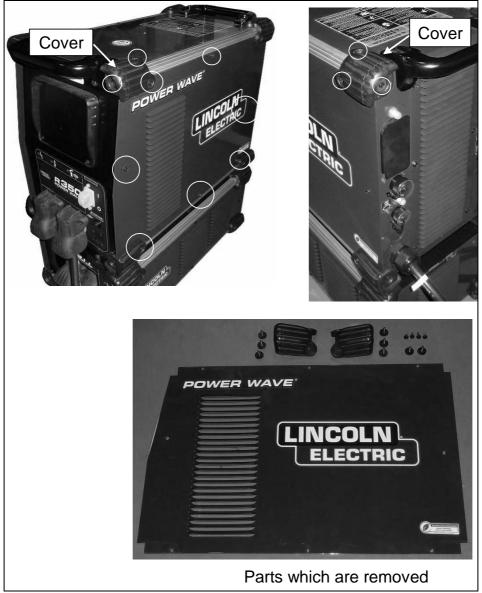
(q) Connection of ROBOWELD iC/H3 (Power Wave R350) (3/4)
